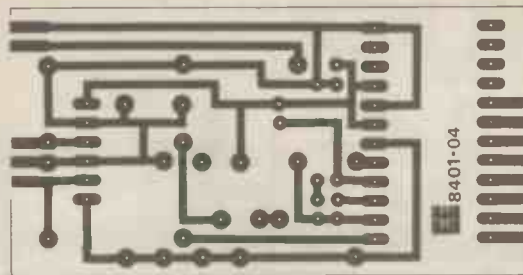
The master p.c.b. pattern (actual size) for the ADC Unit. This board is available from the *EE PCB Service*, Order Code 8401-04.
